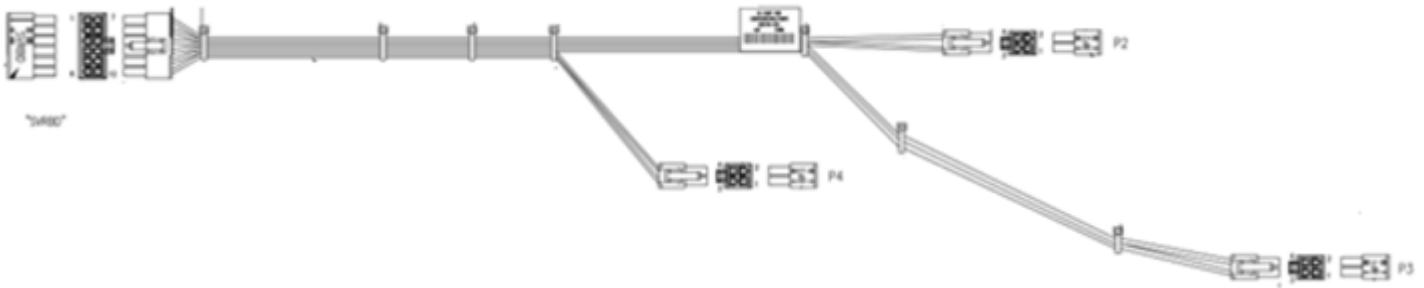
2.5" Drive Module Hot Swap Backplane Power Cable
